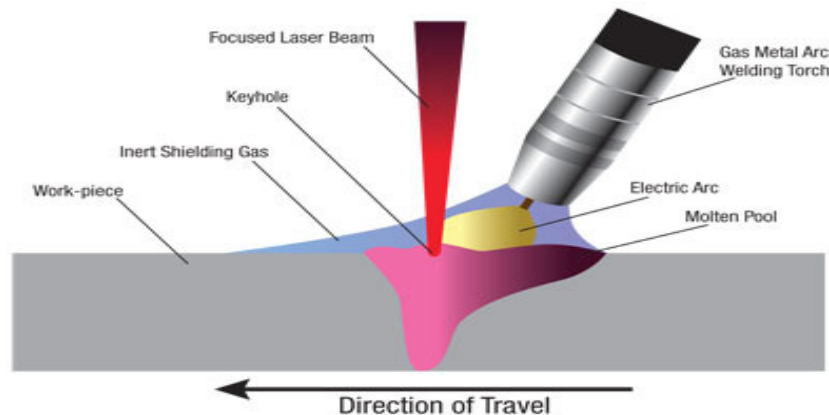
Schematic diagram of hybrid Laser GMAW Welding process
